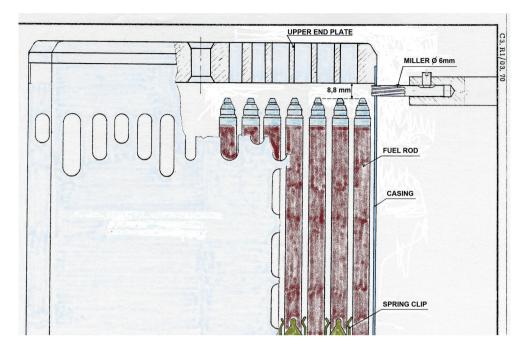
Vertical section of fuel assembly with miller inserted into the casing.
